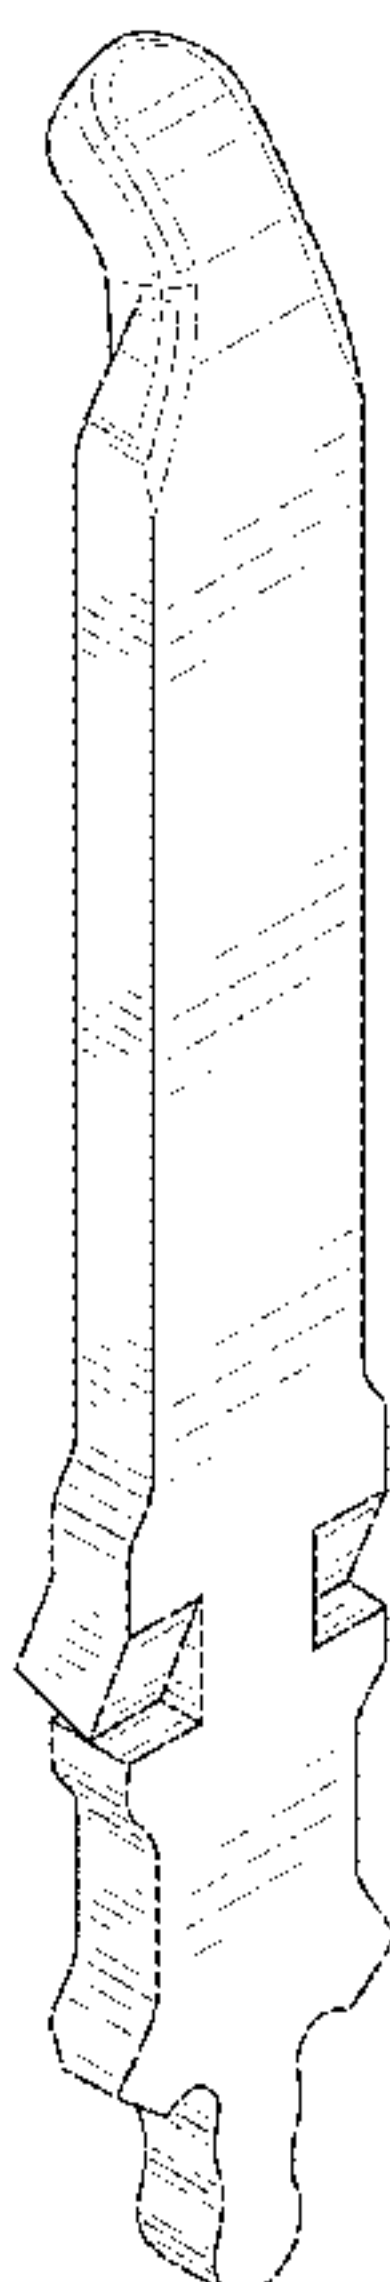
is a top, front, and left side perspective view of a contact showing our new design;
